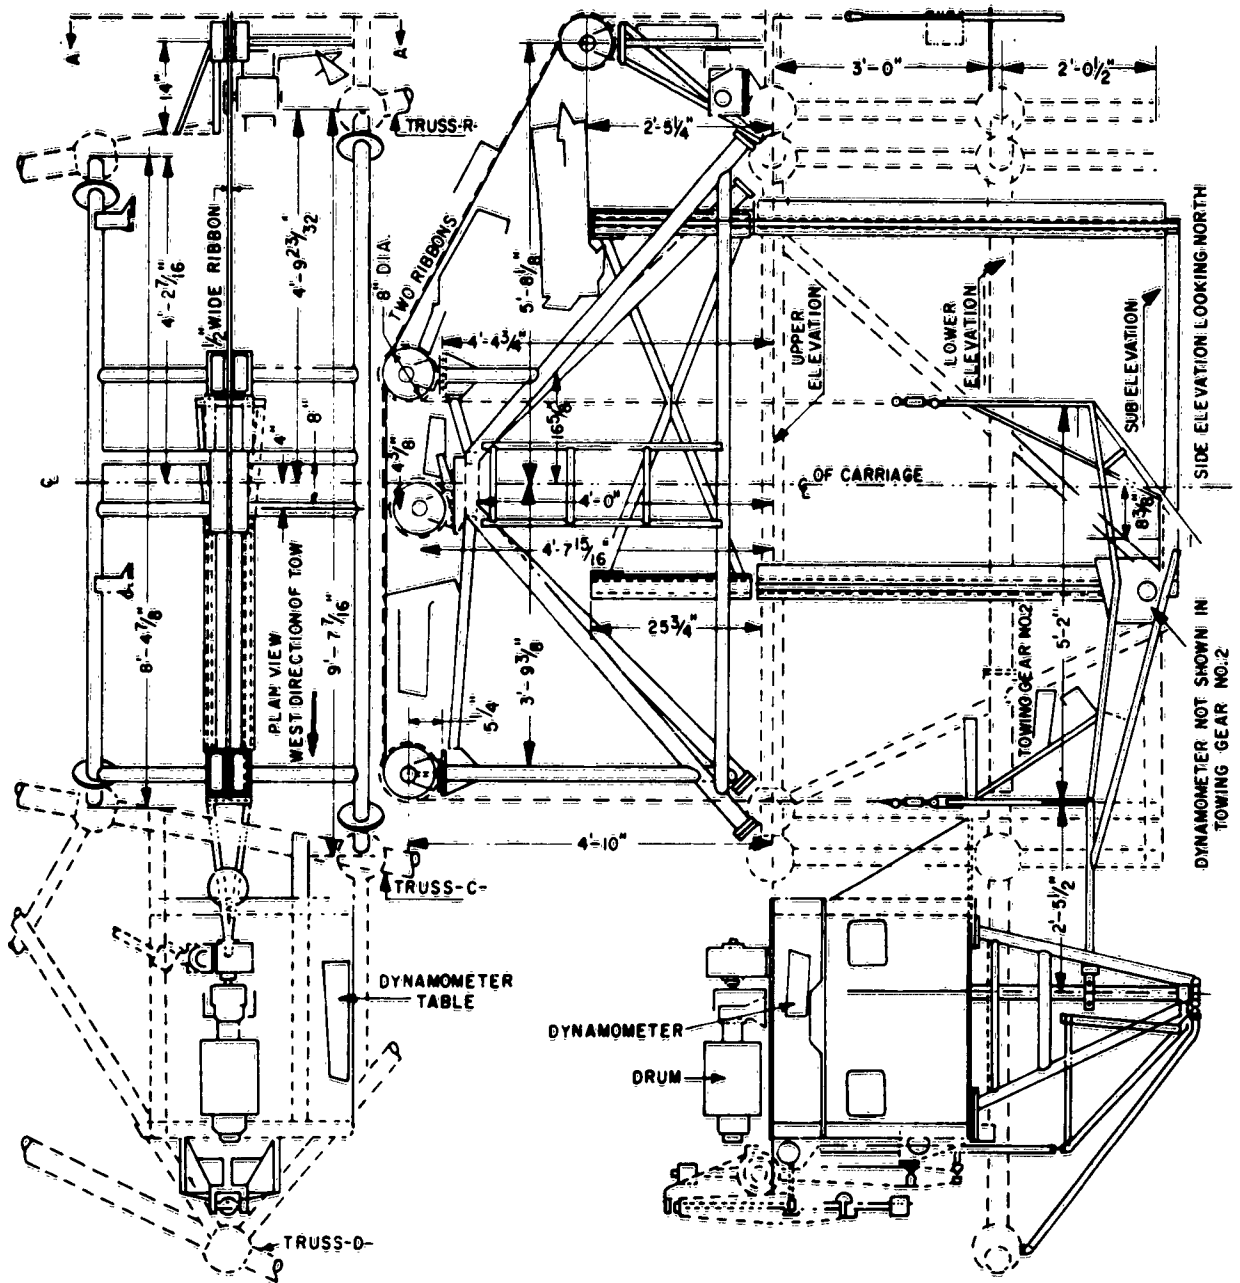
Carriage 3 Dynamometer and Towing Gear No. 2
